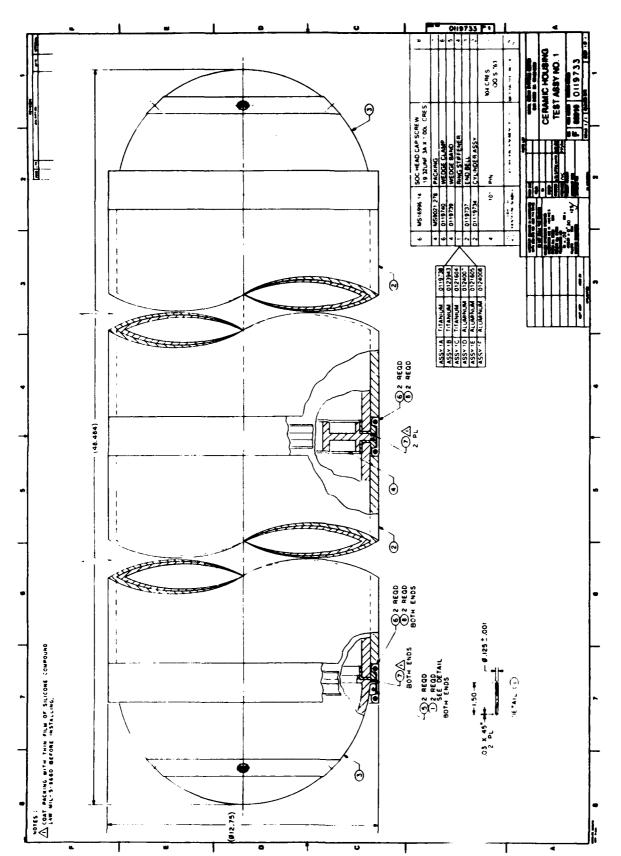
List of components comprising housing test assemblies 1A through 1F.
